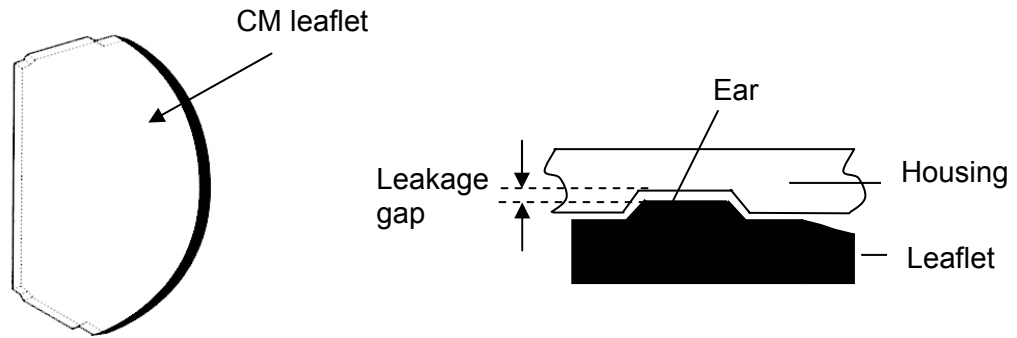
Leaflet design and close-up pivot of a CM valve
